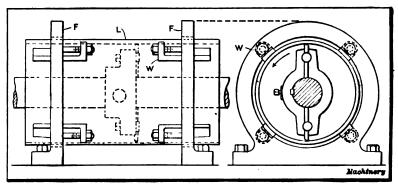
Cylinder Lining Mounted in Fixture for Boring
